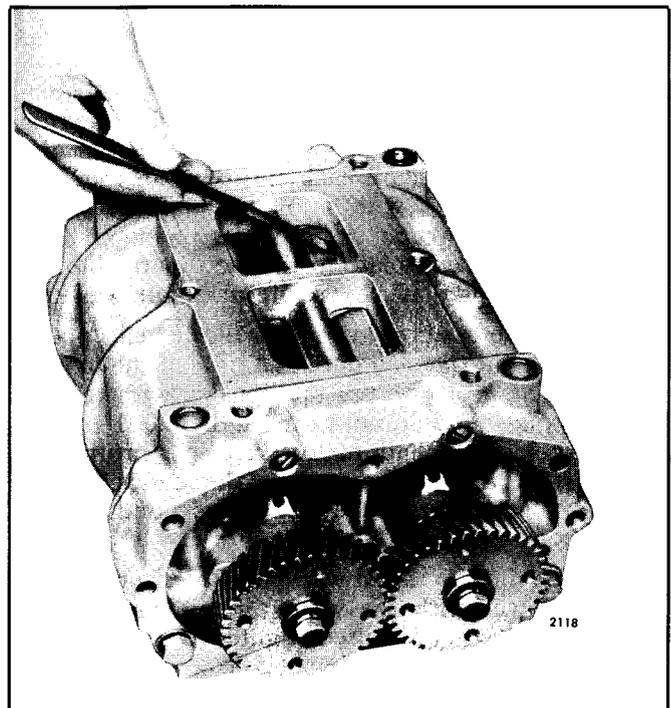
Measuring Rotor Lobe to Housing Clearance
